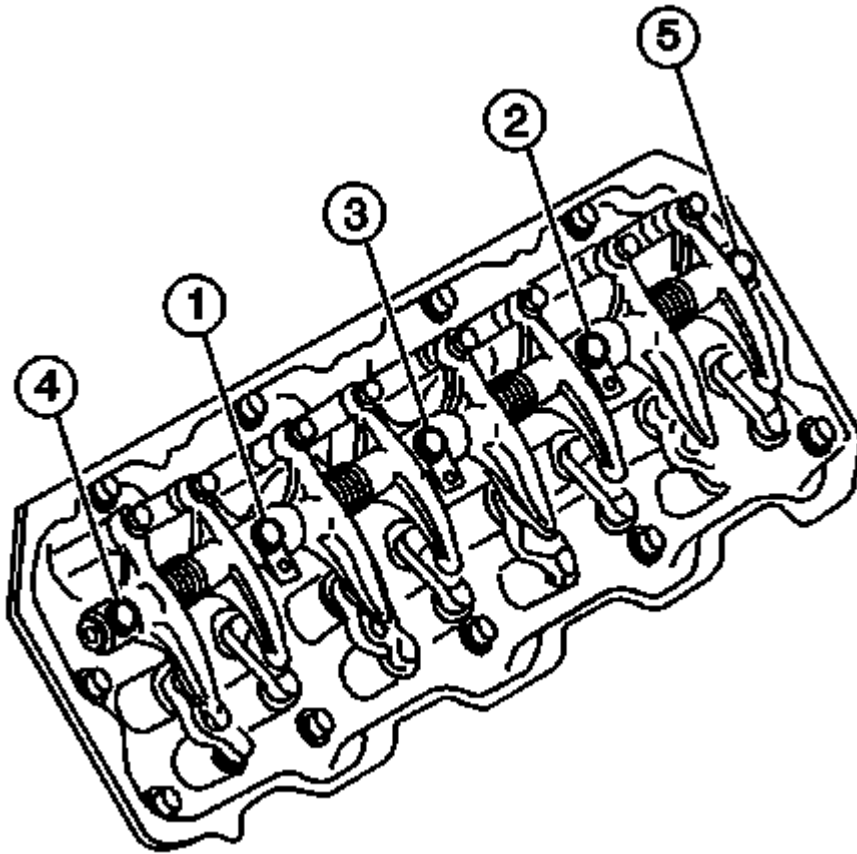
Rocker Arm Shaft Bolts Tightening Sequence
